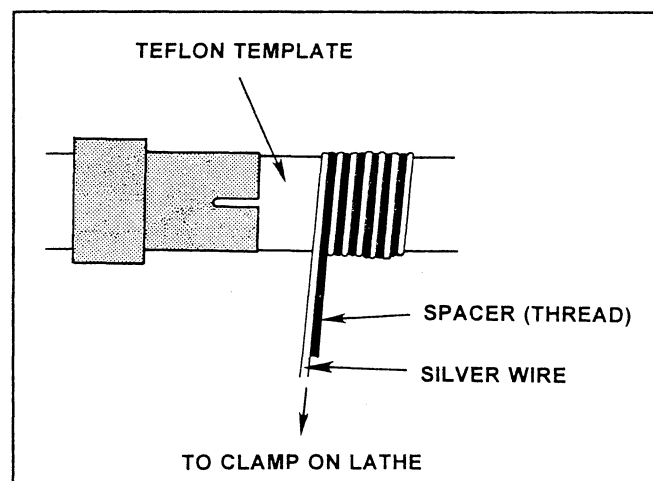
Procedure for hand-winding coils; thread is the winding spacer.
